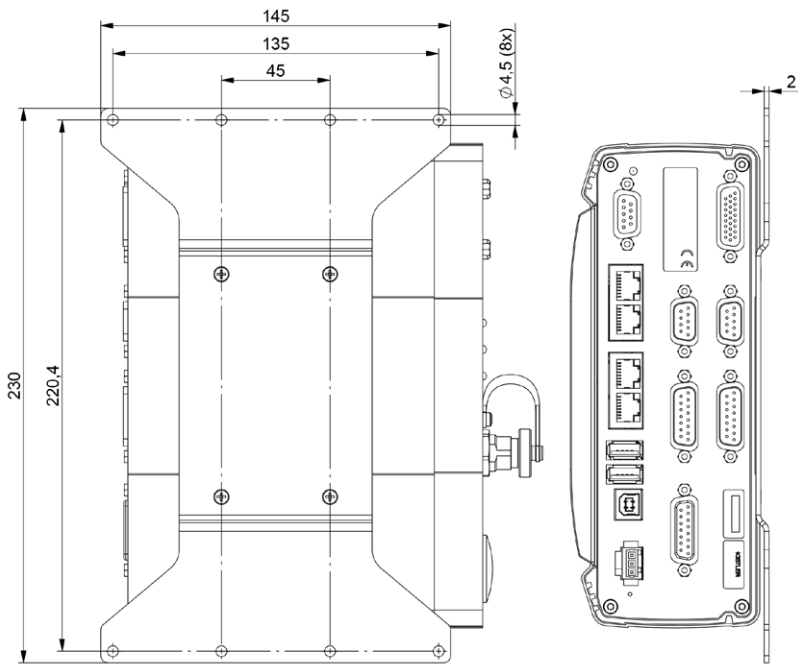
Dimensions ComoScout mounting plate Mat. No. 7.511.368
